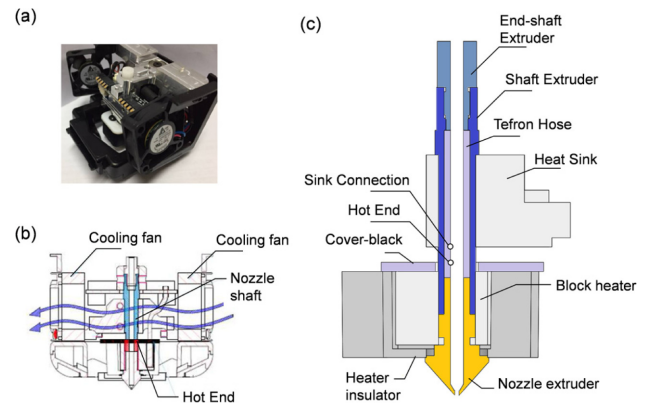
Nozzle structure of 3D printer (a) Photograph of nozzle parts (b) Schematic figure of the nozzle parts (c) Sectional view of the nozzle
